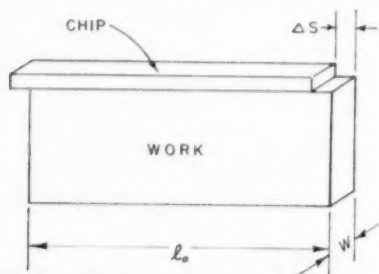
SCHEMATIC REPRESENTATION OF SURFACE DISPLACEMENT OF WORKPIECE DURING CHIP REMOVAL
